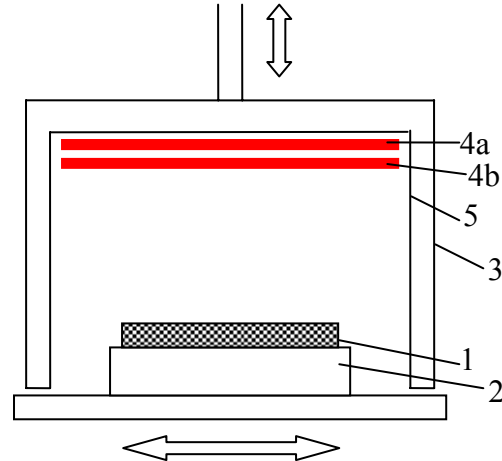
Camera for infrared welding of large area plastic details: 1 – plastic detail; 2 – fixture accessory for the detail; 3 – corps; 4 – heater (4a – upper section, 4b – lower section); 5 – reflectors.
